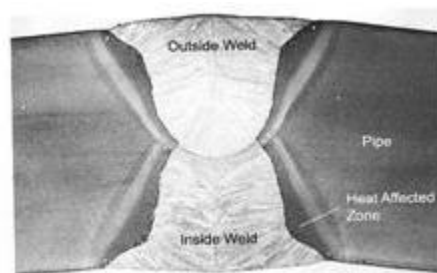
Welding metallography at the top edge of the plate [22].
